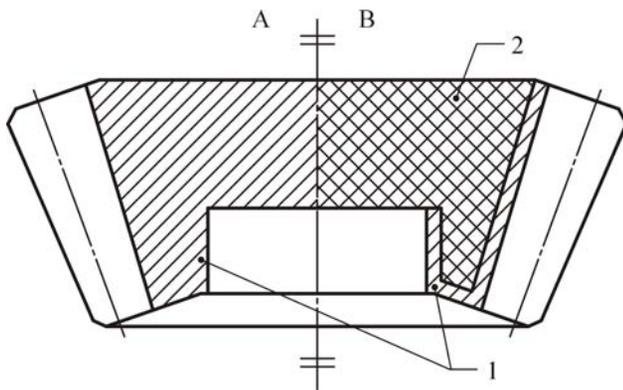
Cross sections of analyzed gear: A – full pattern, B – hybrid pattern; 1 – resin, 2 – casting wax
